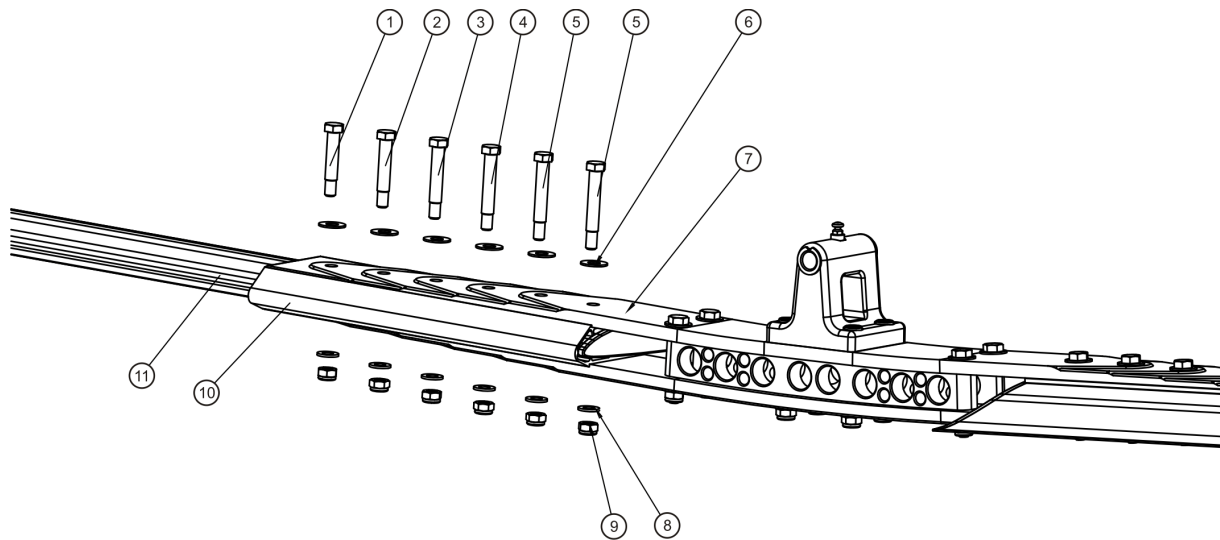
Disassembly rotor - teetering parts (Effectivity: RS II)
